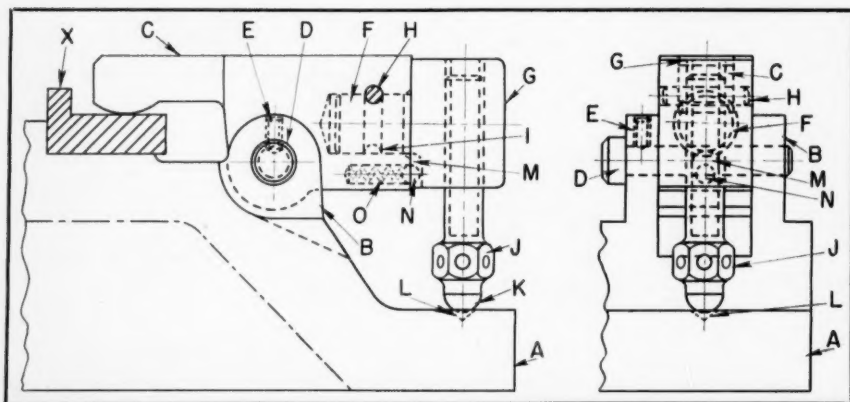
Drawing of quick-acting fixture clamp with low overhead clearance
